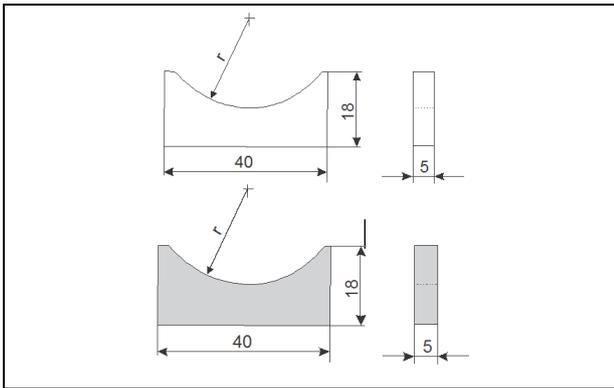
Dimensions of test samples: a) TEFLON (PTFE), b) POLIAMID 6.6+MoS2
